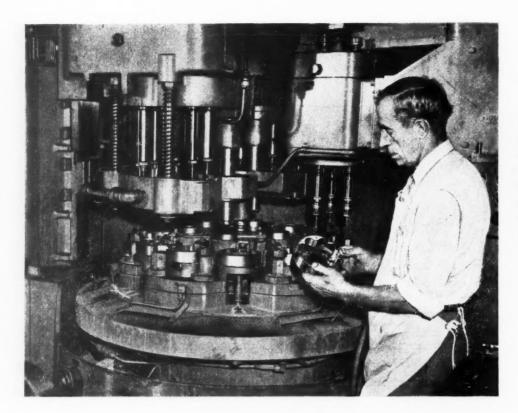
Holes in the front planetary cage of transmission are drilled, countersunk, reamed, and tapped, and pinion pockets are counterbored, on a six-station double-indexing machine
